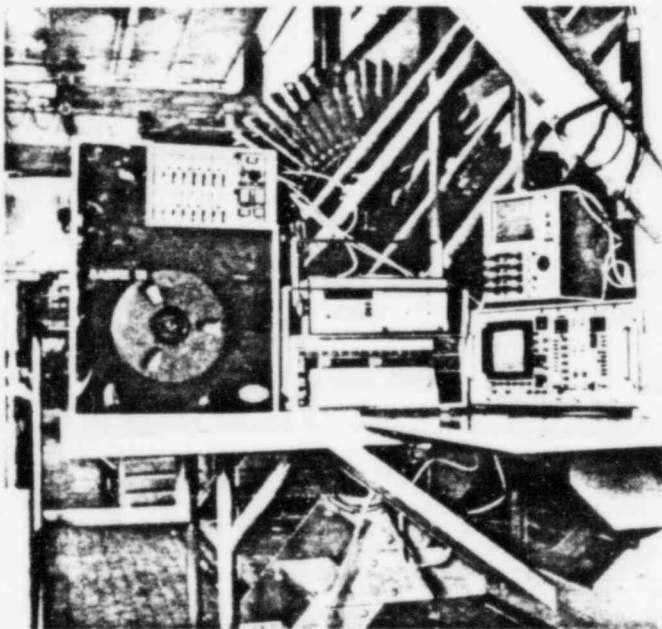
In-service Inspection of Fully Bladed LP Rotor.
